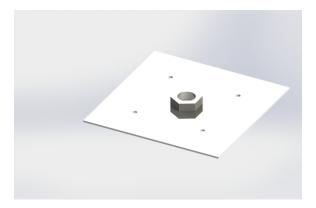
The sheet metal plate used to connect the nuts to the stationary center plate and the rotating circular plate.
